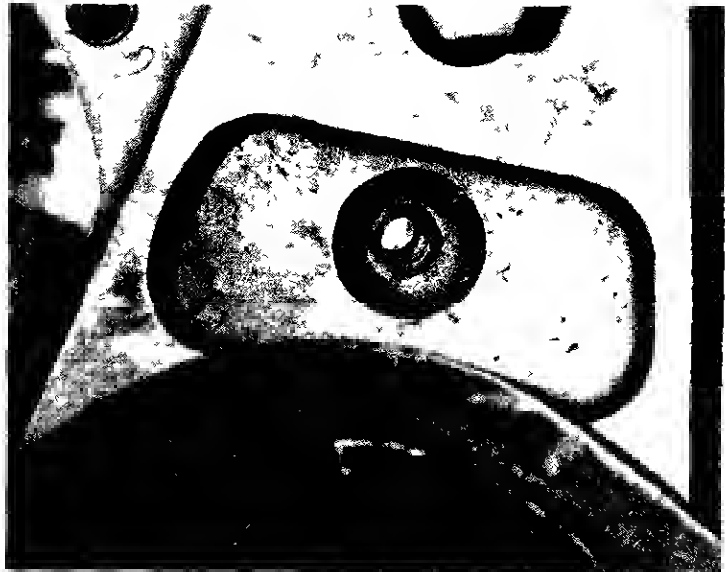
Close-up view before disassembly of bushing against which head of bolt should have been.
